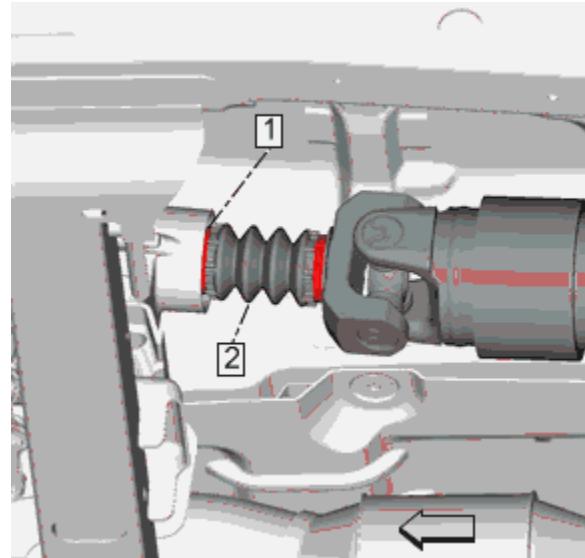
Front Boot Clamp And Propeller Shaft Slip Yoke Boot
